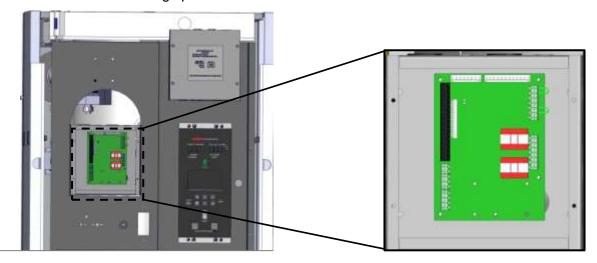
Input/Output (I/O) Box Location – Partial Front View
